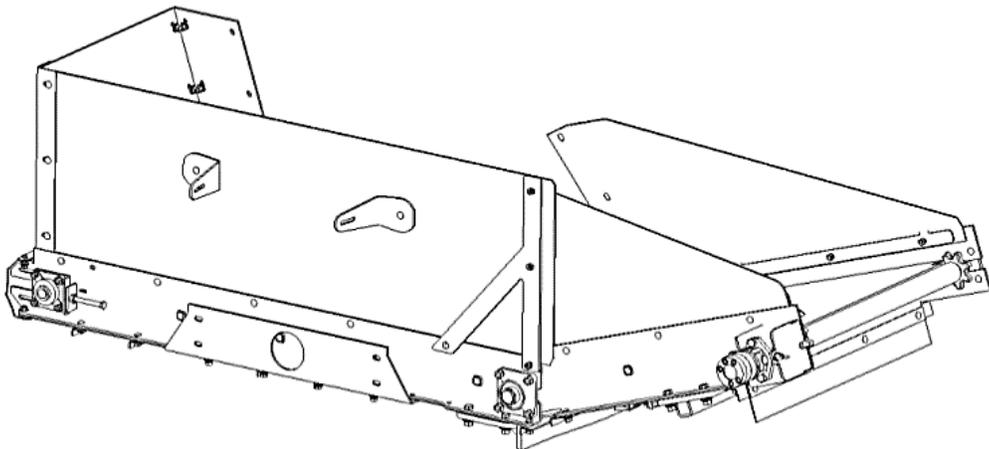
6ft Left Discharge Conveyor with 41in Extension
